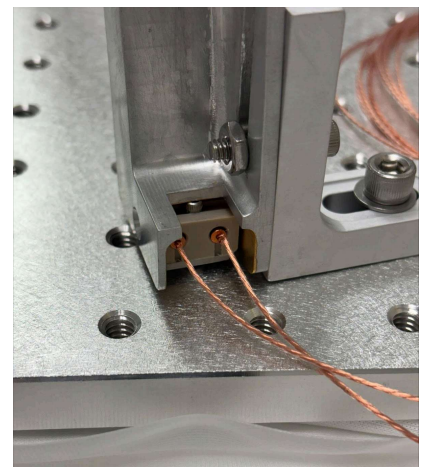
Crimping of NiCr to Copper wire through the PEEK endpiece
